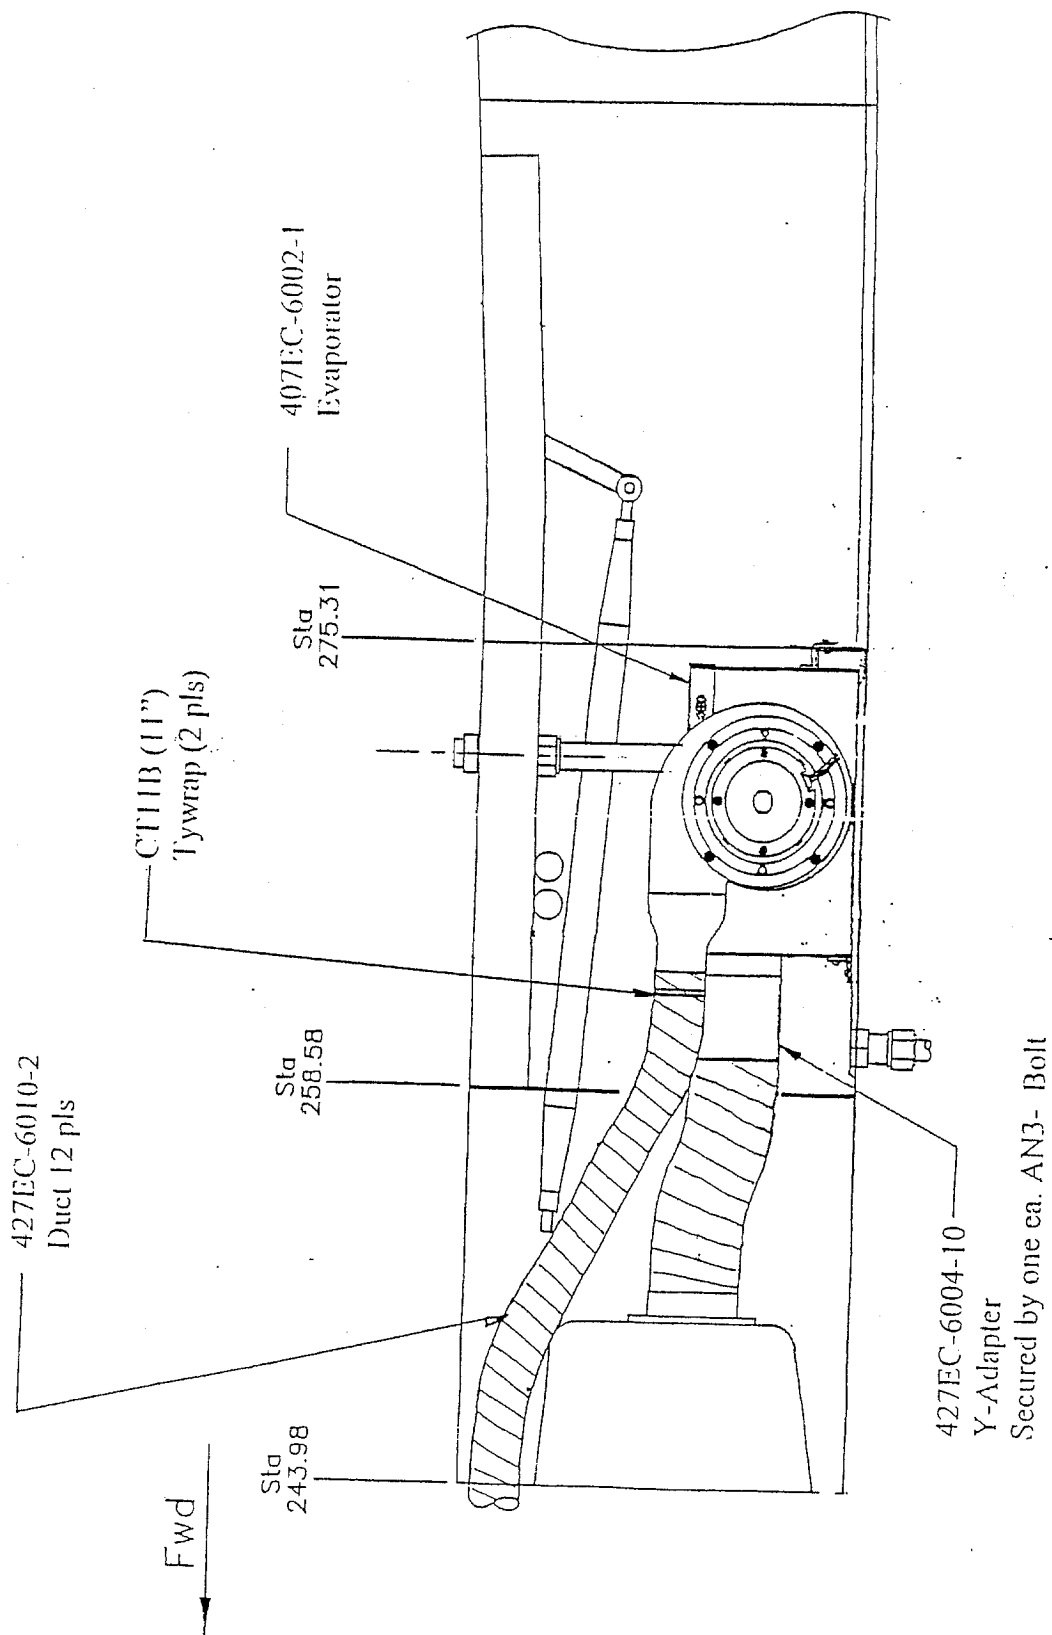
Aft Evaporator Installation - Looking Inboard (Sheet 1 of 3)
